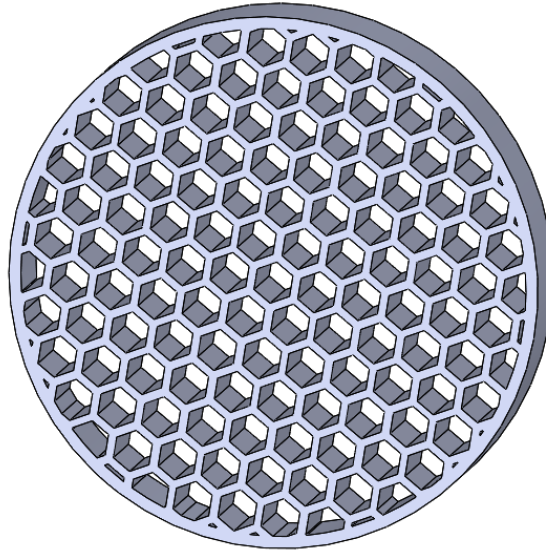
An elevation view of the 3D model used to program the laser cutter that manufactured the honeycomb sections from acrylic sheet that were later welded together.
